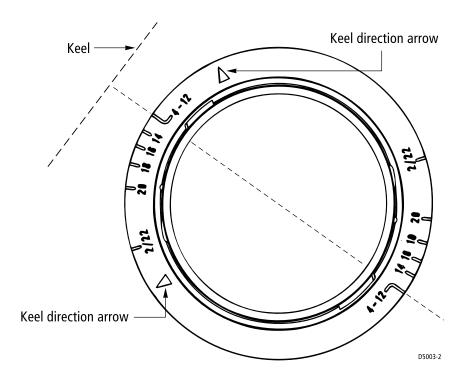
Aligning the Base Flange with 4–12° Deadrise Angle
